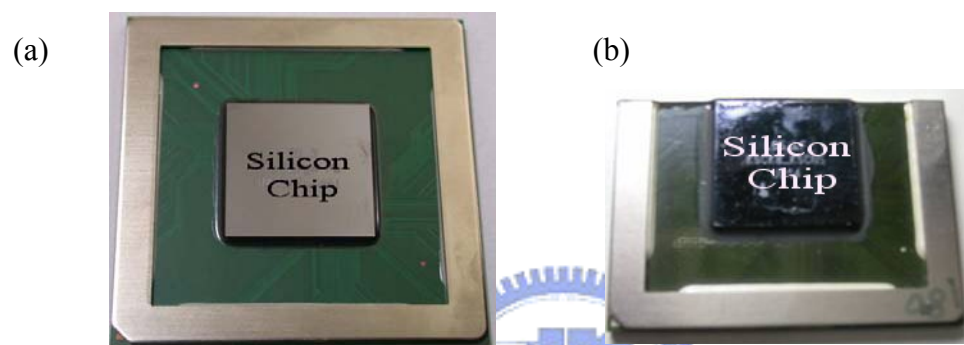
The experimental FC-BGA assembly (a) before and (b) after cutting
